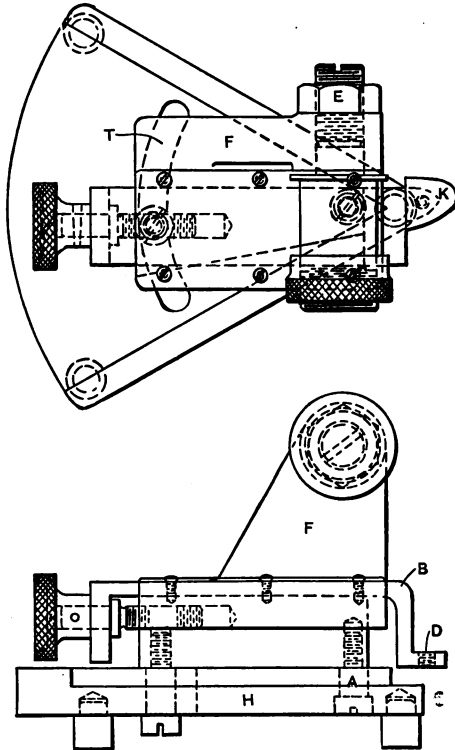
Device for Grinding Formed Fluting Cutter Shown in Fig. 73
